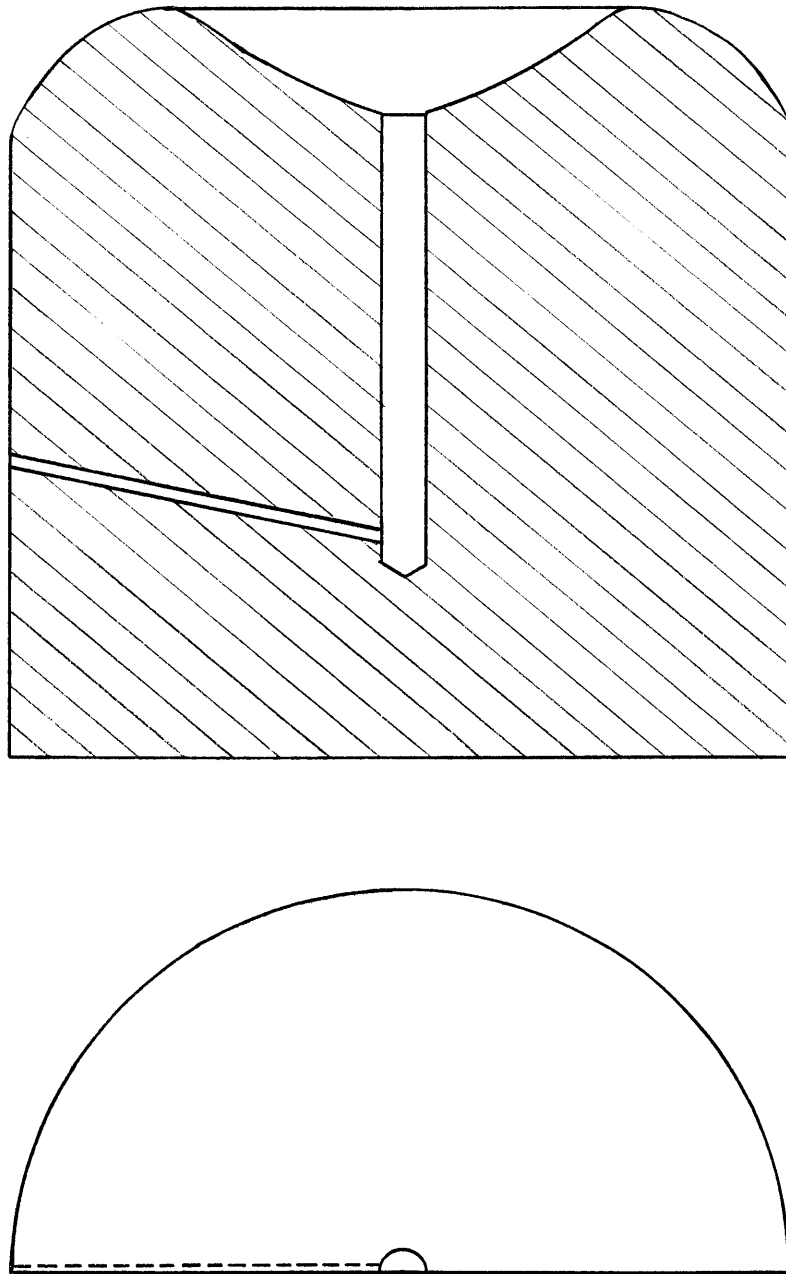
Drawing of one half of the copper chill mold used in preparing the dilatometric specimens.
